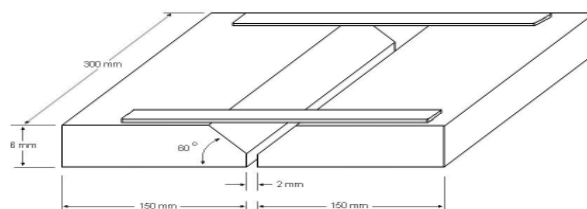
The tack weld and clamping technique for securing and avoiding the plates from distortion.
